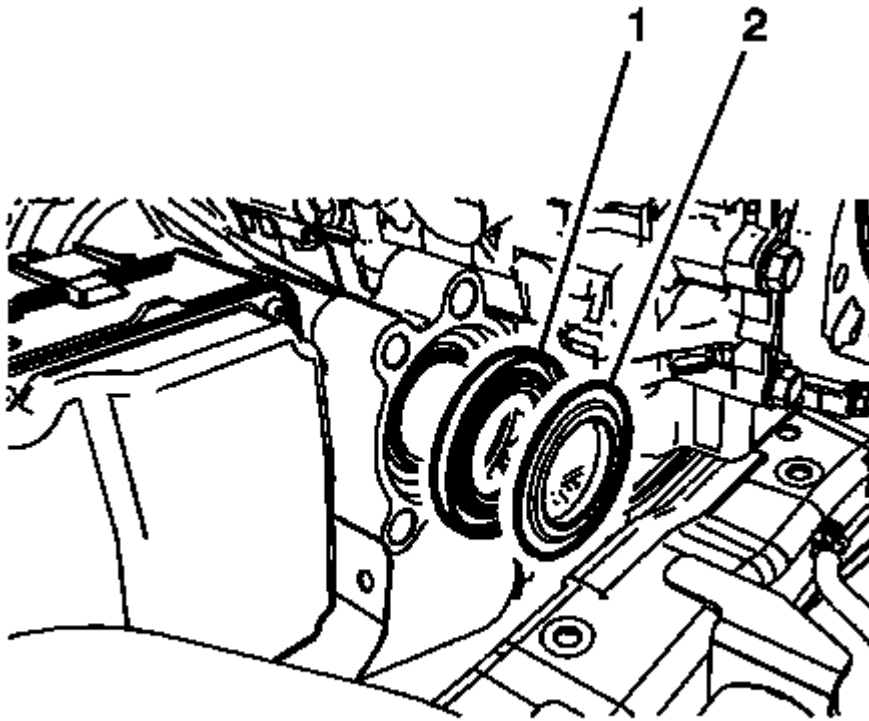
Wheel Drive Shaft Seal And Dust Deflector
